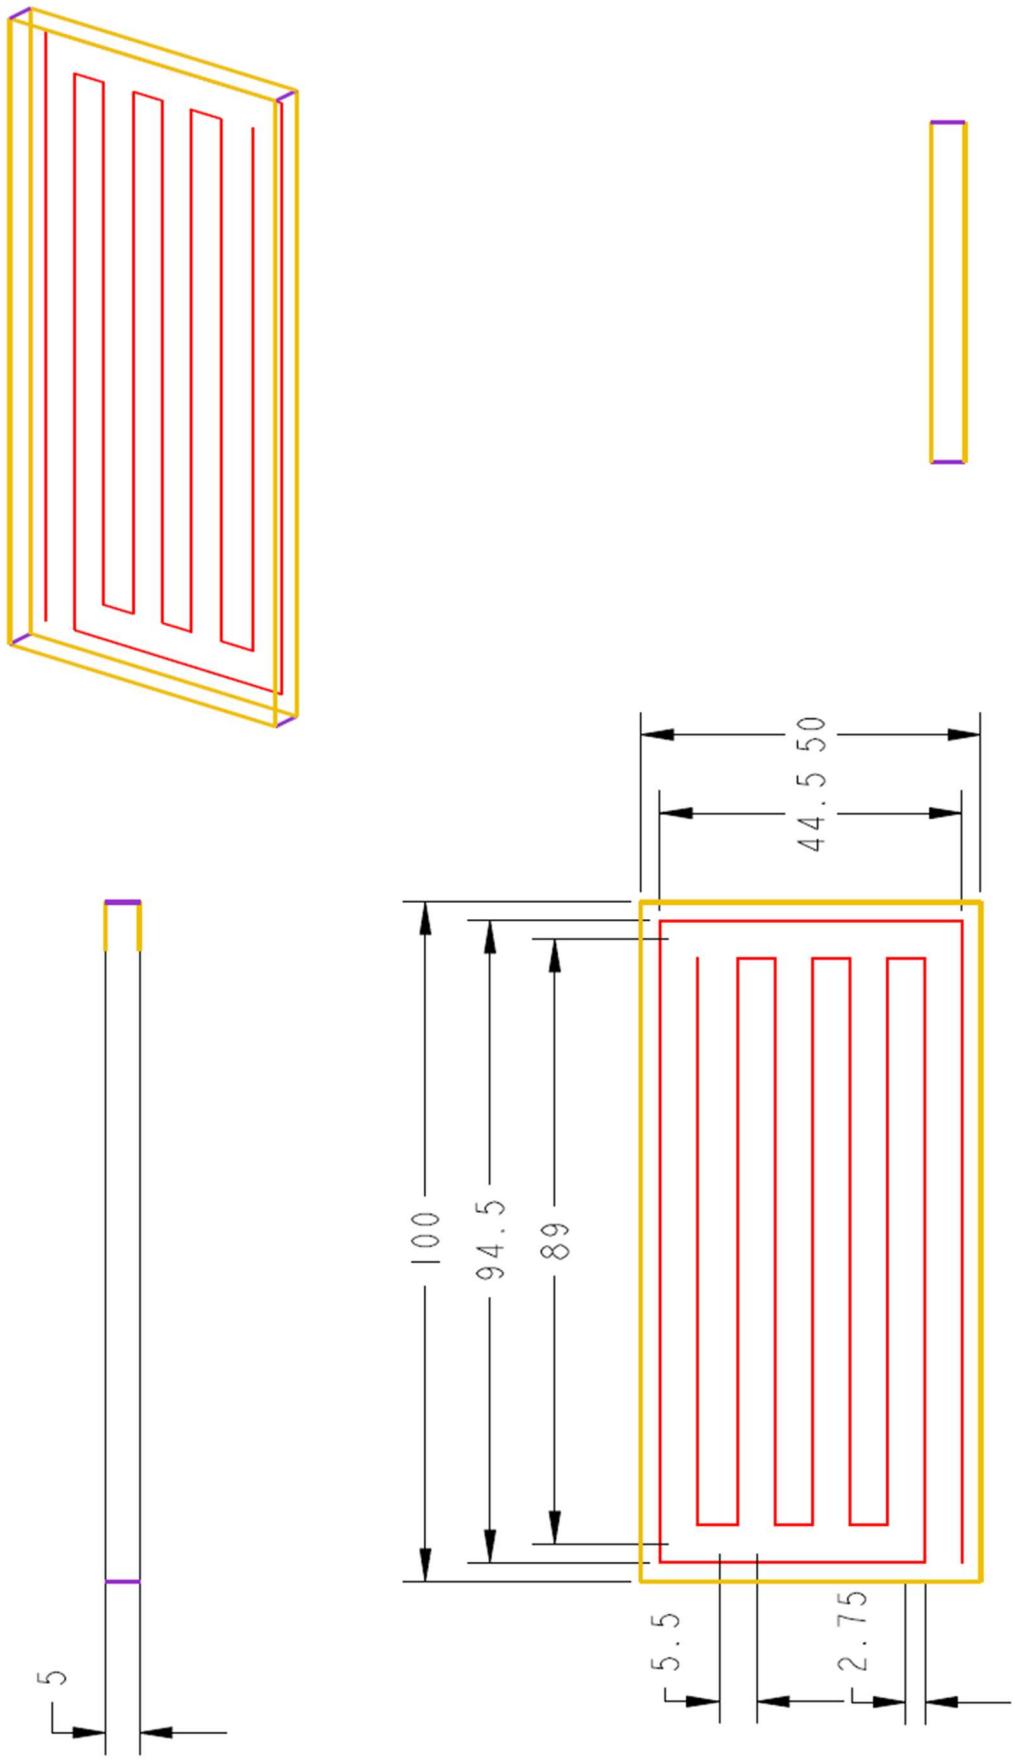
Rectangle 2D Layer Horizontal Fill CAD drawing.
